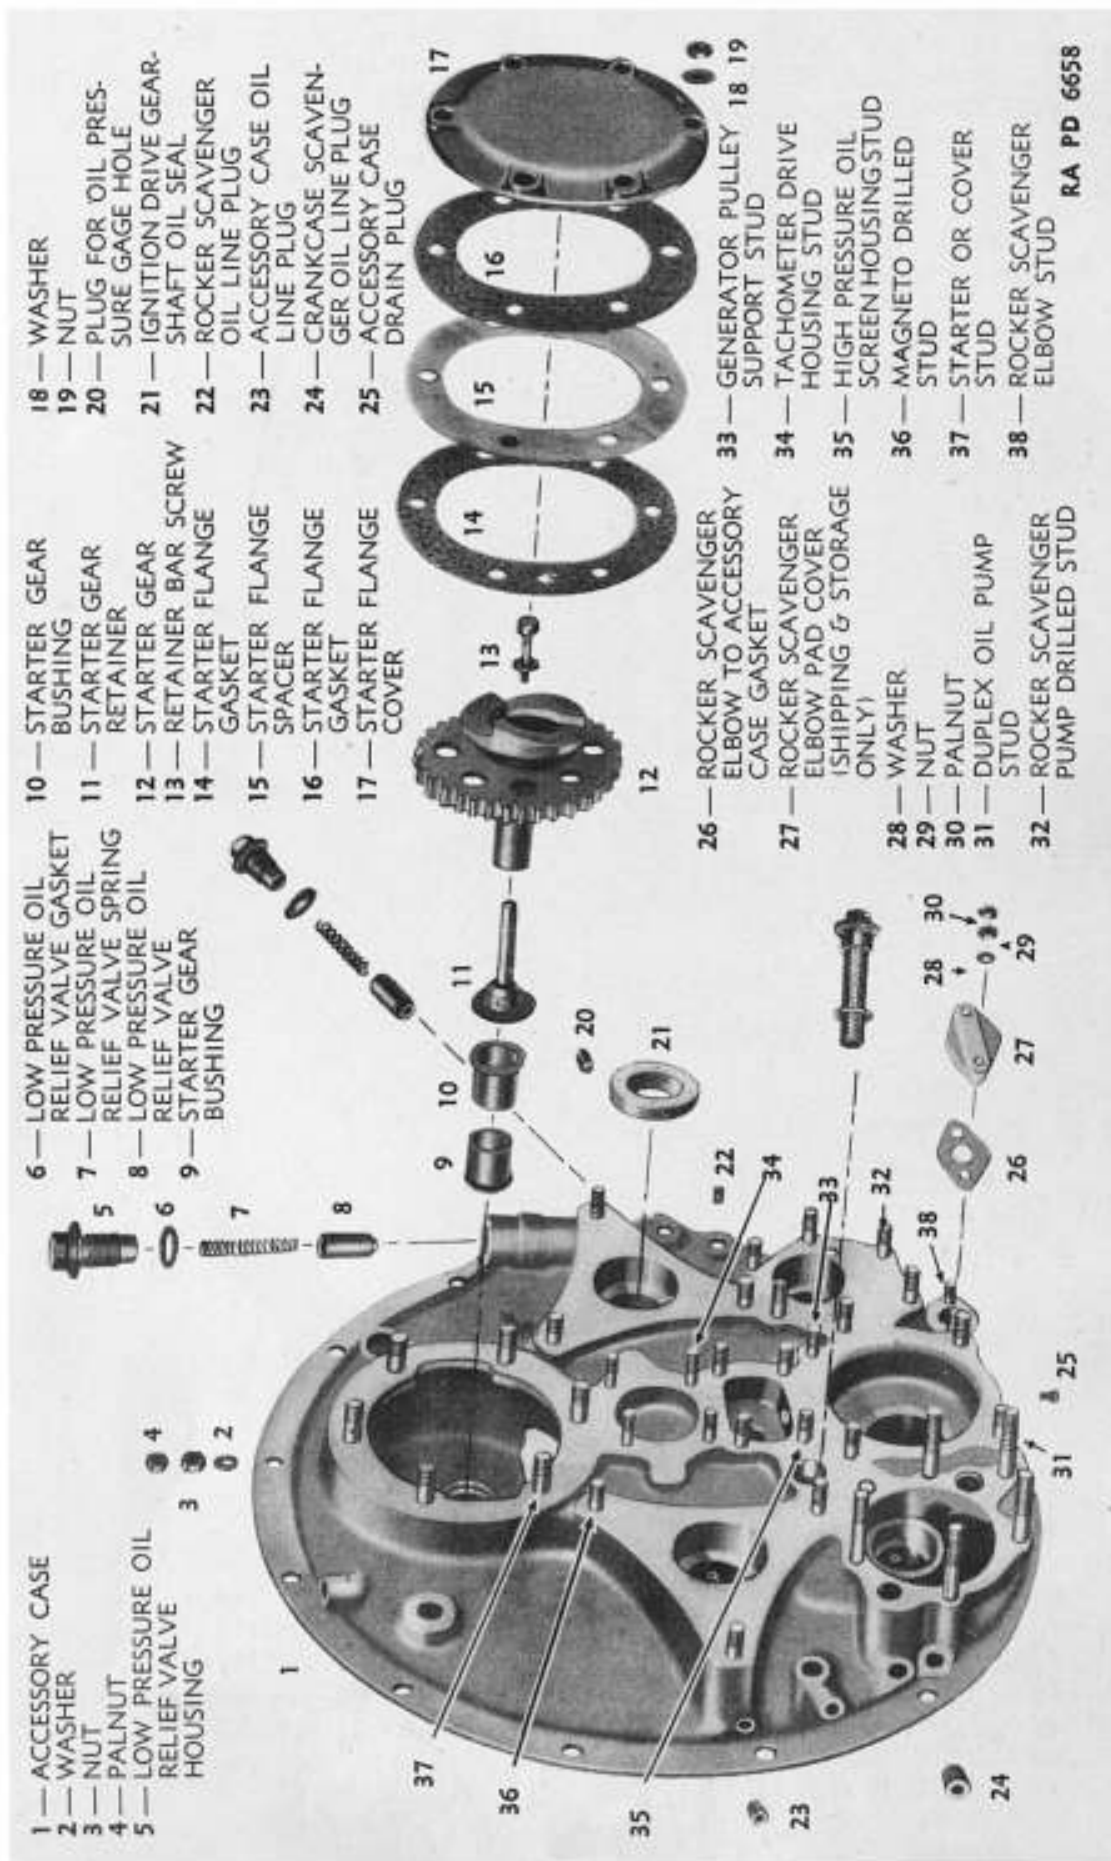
EXPLODED VIEW OF "OUTSIDE" OF ACCESSORY CASE
